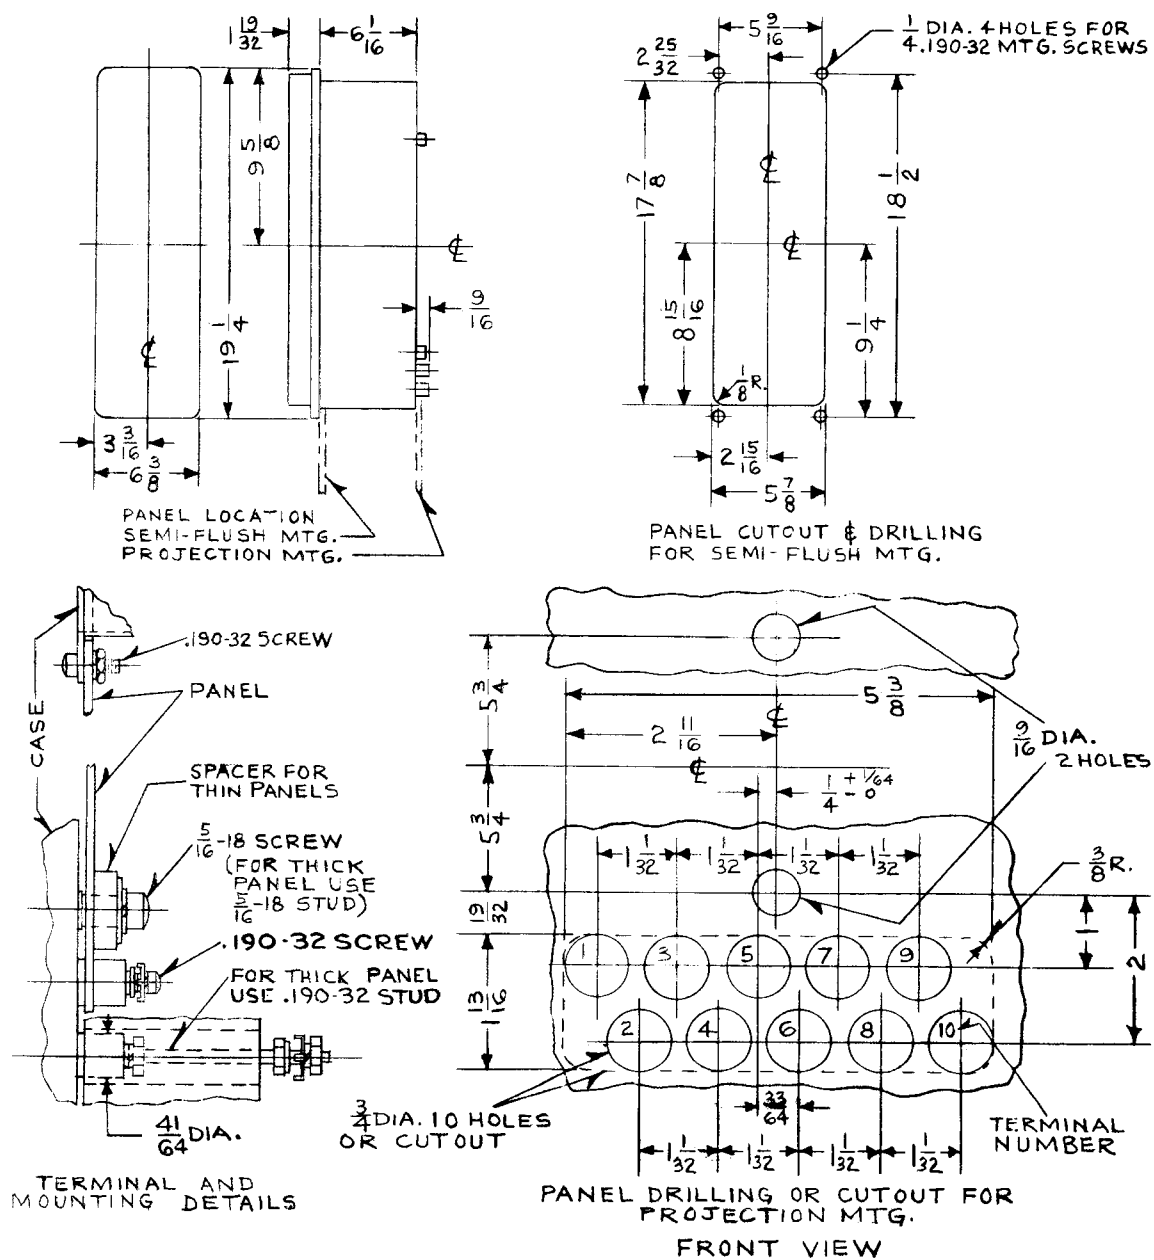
Outline and Drilling Plan for the Type FT22 Case
